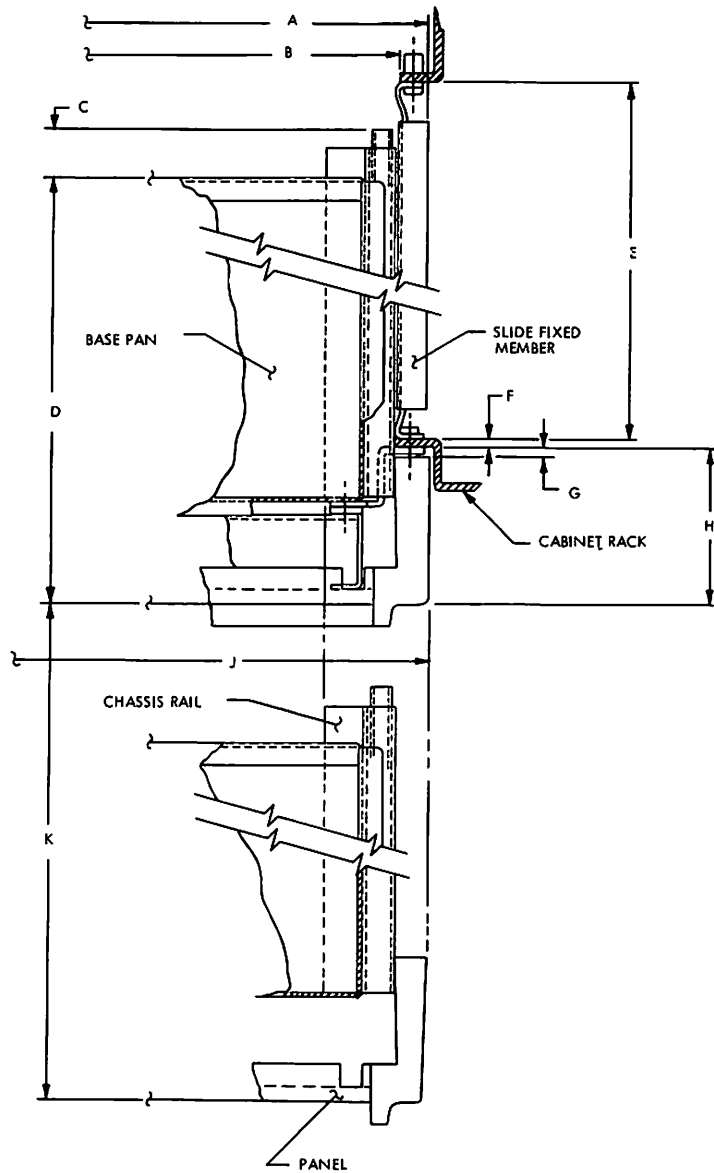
SLIDE/DRIVE MOUNTING CROSS SECTION
